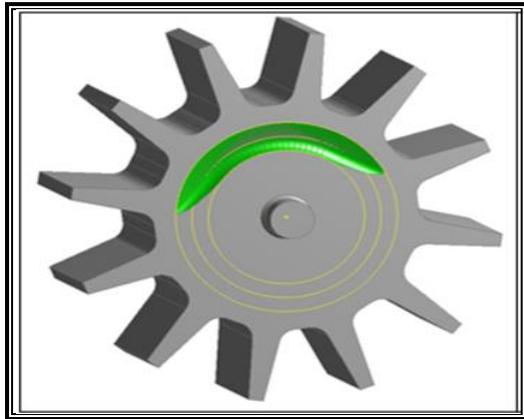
TURBINE WHEEL WITH BALANCE CUT
